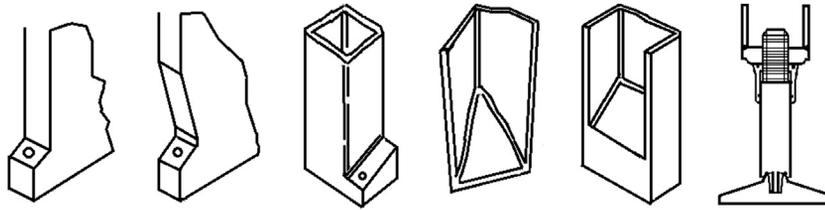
Feet ends may have a foot base with flat (not recommended) or sloped surfaces (recommended), or may consist of a pivot-socket arrangement where the pivot-end of the spindle may freely swivel in the socket or internal cavity of a separate load-bearing foot base. Feet ends with horizontal flat surfaces are not recommended. For maximum drainability, all surfaces of the feet not in contact with the floor should be sloped, with rounded corners and smooth welds (APV Baker, 2001).
